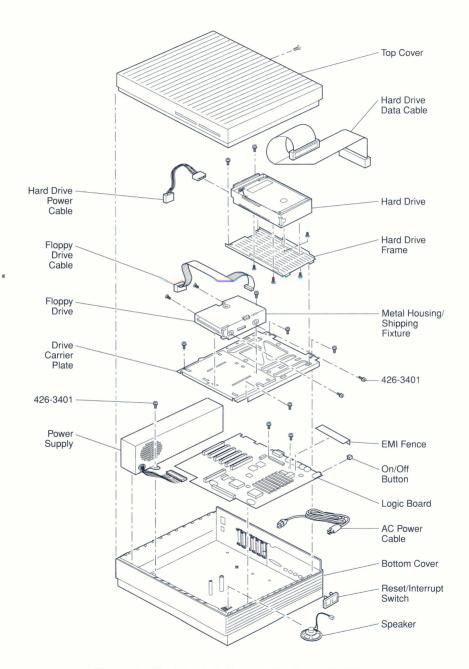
Macintosh II, IIx, and IIfx Exploded View
